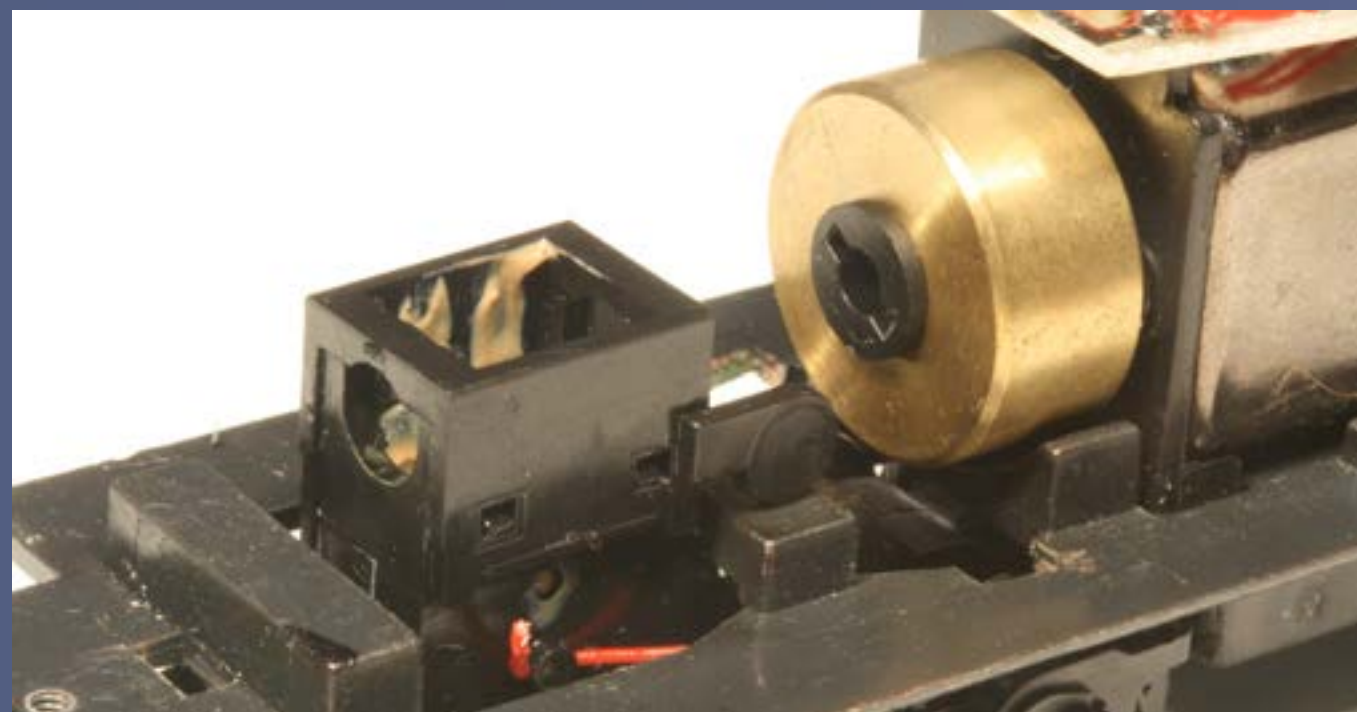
Once the worm gear has been removed the wheels of the truck will turn freely. The final step is to place the retainer clip back onto the top of the truck, once again securing the truck to the frame.
